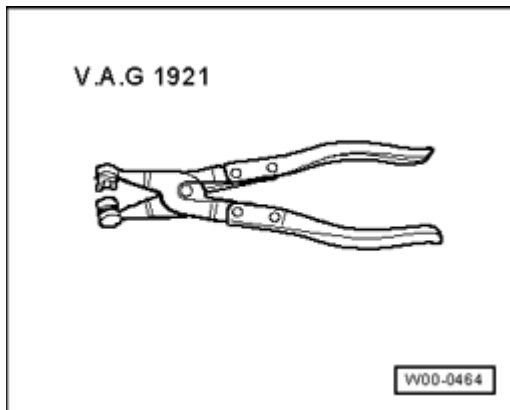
Identifying Special Tools - Right Front Coolant Pipe, Removing And Installing
